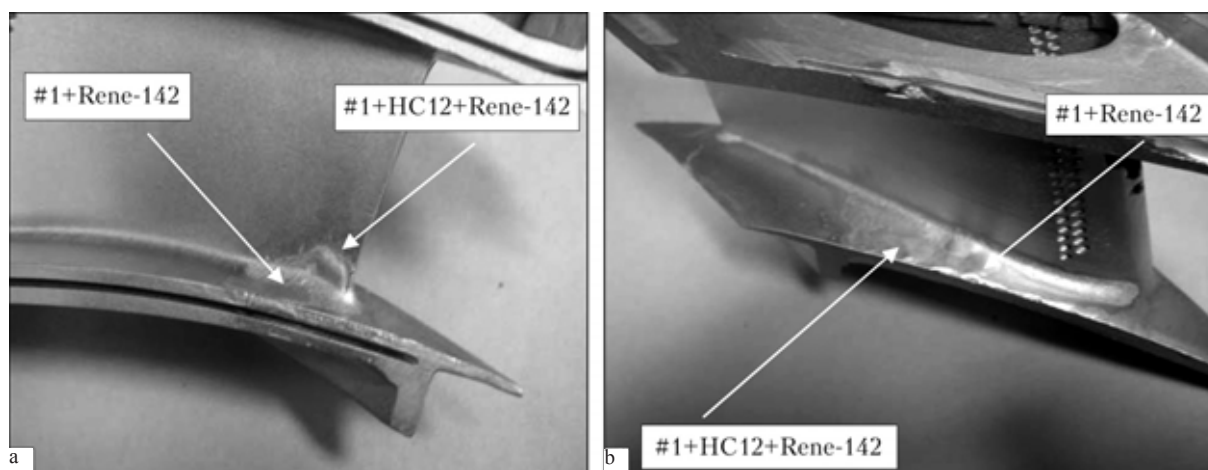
Sections of repair brazing at the outlet edge (a), on the shelf (b) of a blade made of ZhS6U alloy in a segment of the nozzle system of D80T engine.
